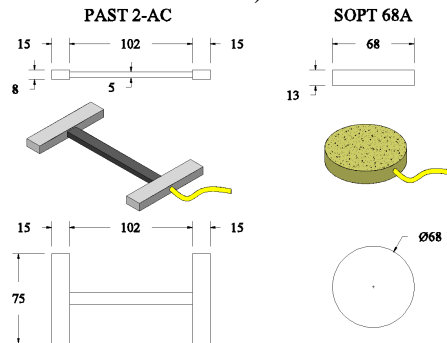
The shape and dimensions (in mm) of the tensometric transducers
